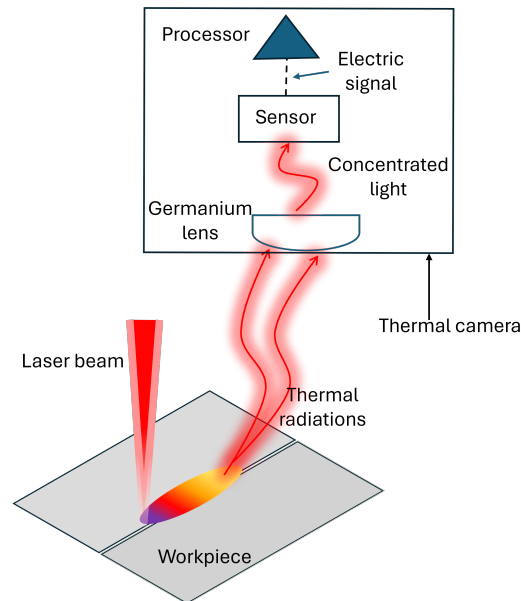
Schematic of IR-thermography acquisition in laser welding, illustrating an oblique viewing geometry and a representative ROI around the seam.
